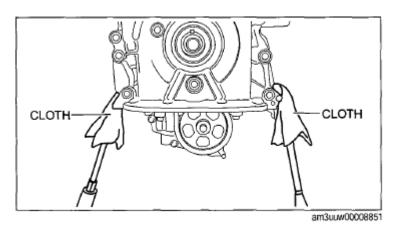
Peeling Sealant Away Using Cloth Wrapped Screwdriver
